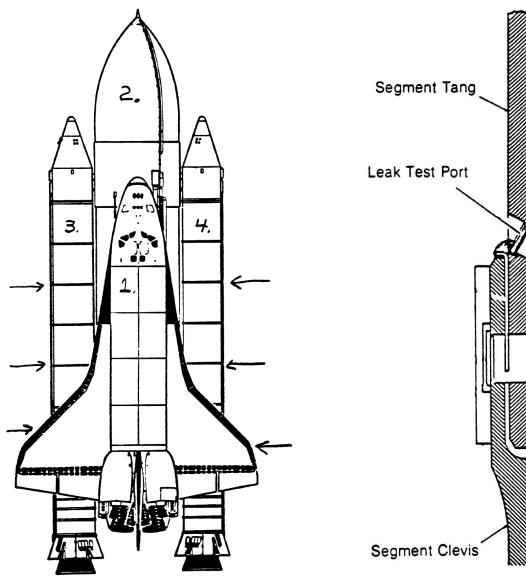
Space Shuttle: Orbiter, External Tank, Solid Rocket Motors, and Field Joints.
